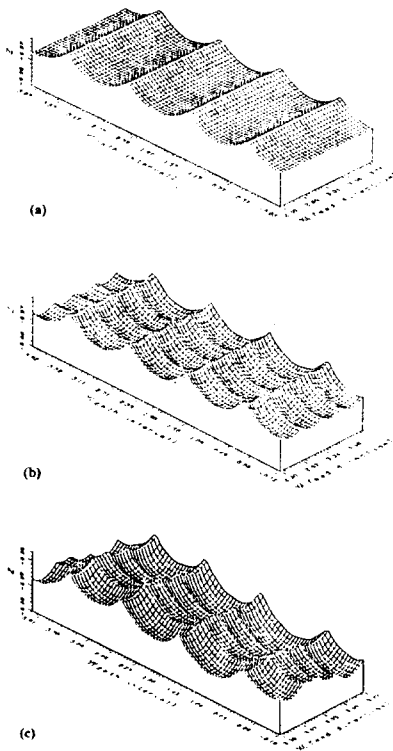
3-dimensional shapes of the machined surface: (a) conventional concept; (b) considering cutter mark only; (c) considering cutter mark and runouts
